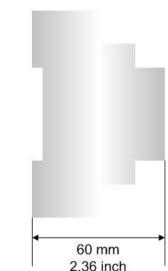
Mechanical dimensions scheme for HD67032M-40, HD67032M-80, HD67032M-160,
